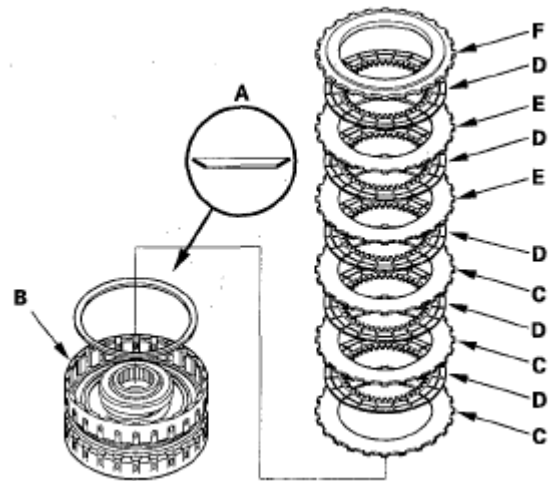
Assembling 5th Clutch Drum Flat-Plates And Discs
